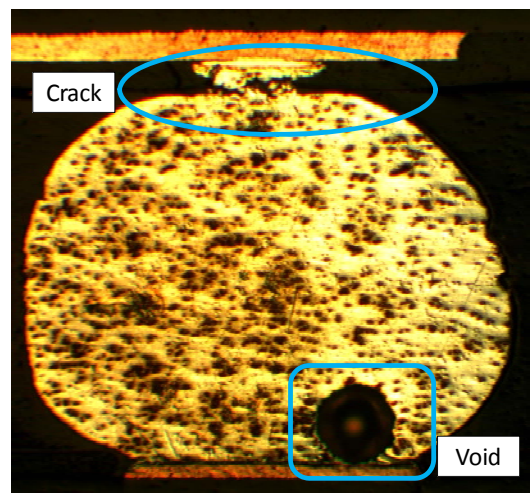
optical micrograph of a cross-sectioned PBGA interconnect. The solder neck has almost completely cracked through. Also, a large void can be seen in the bottom right corner of the joint
